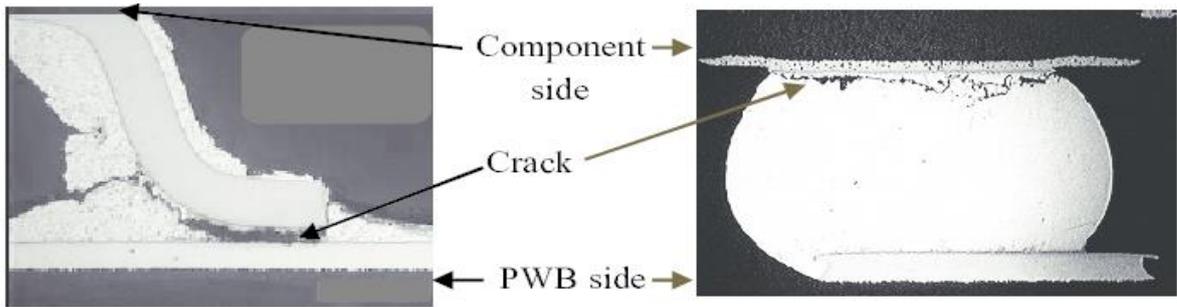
Typical QFP and BGA solder joint crack after a Temperature Cycle Test
